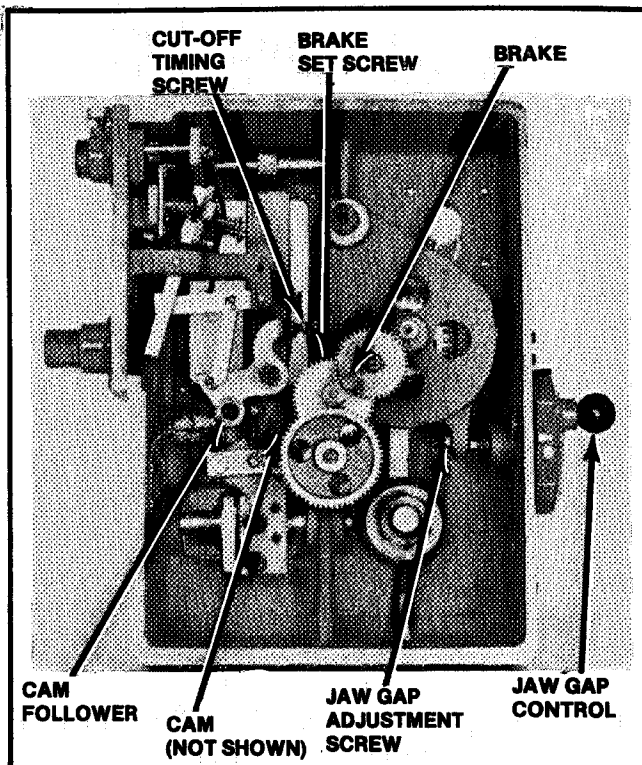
JAW GAP ADJUSTMENT - REAR VIEW.
